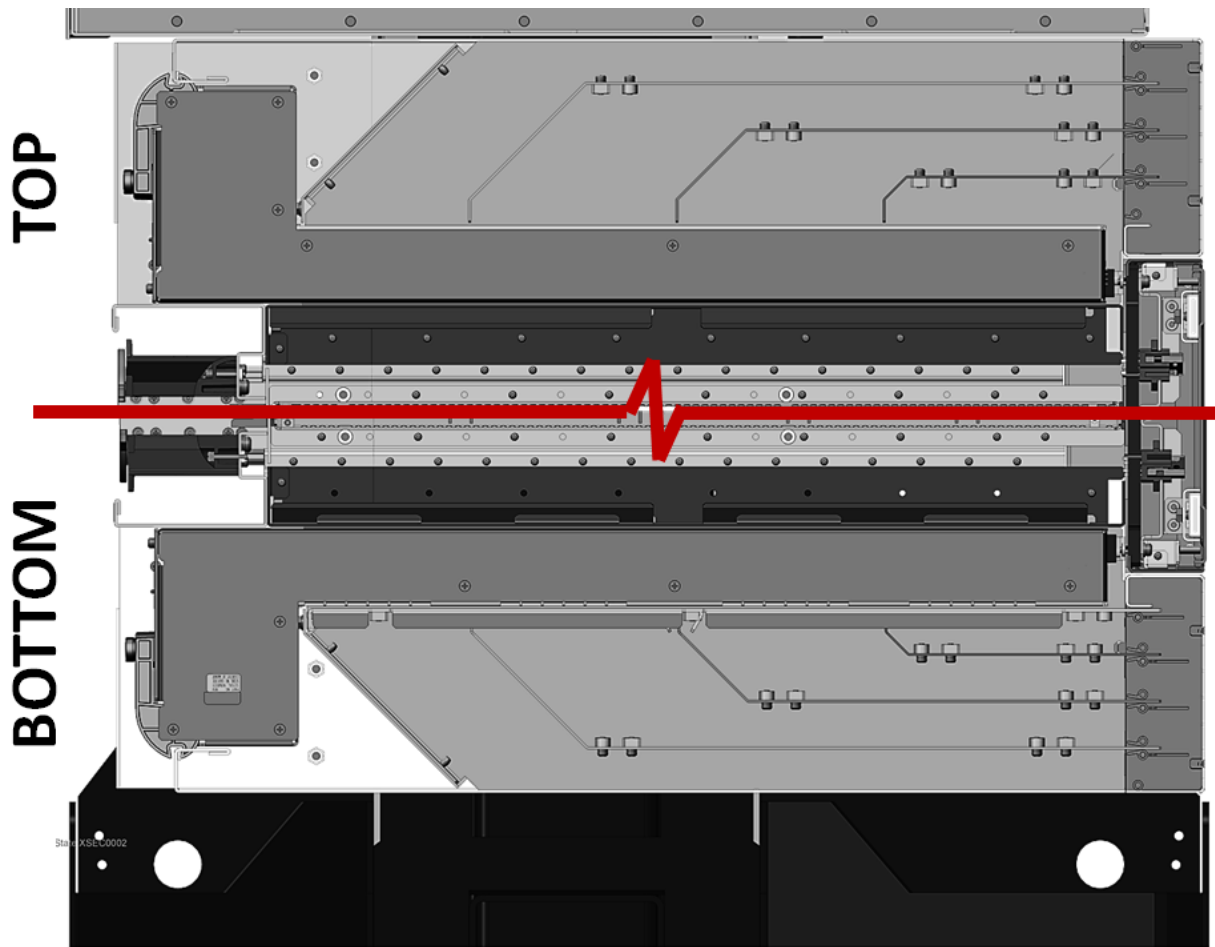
Top and Bottom Fan Orientations: Broken Section View
